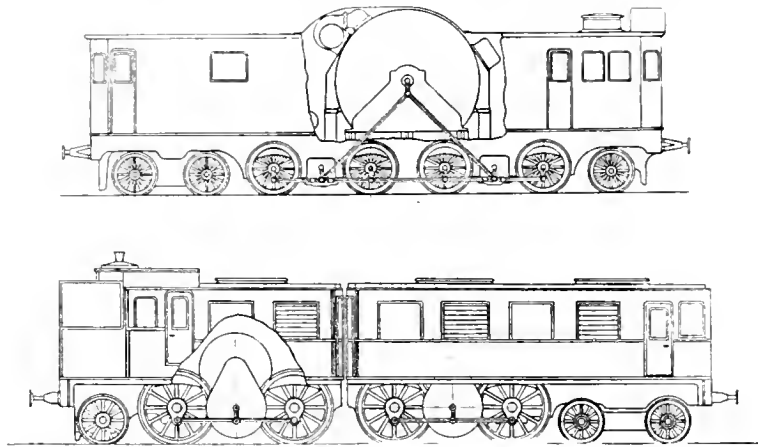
Silesian State Railways. Proposed express locomotives. Upper, triangular side rod drive; Lower, geared side rod drive
